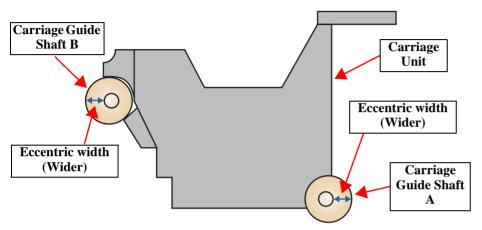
Removing the Carriage Unit and Carriage Guide Shaft A
